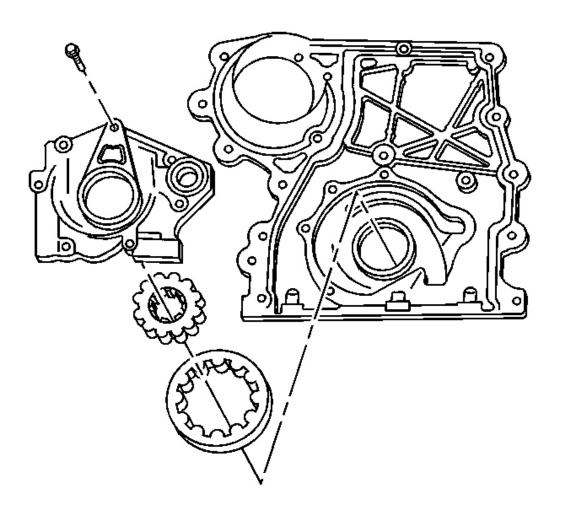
Exploded View Of Oil Pump Courtesy of GENERAL MOTORS CORP.
